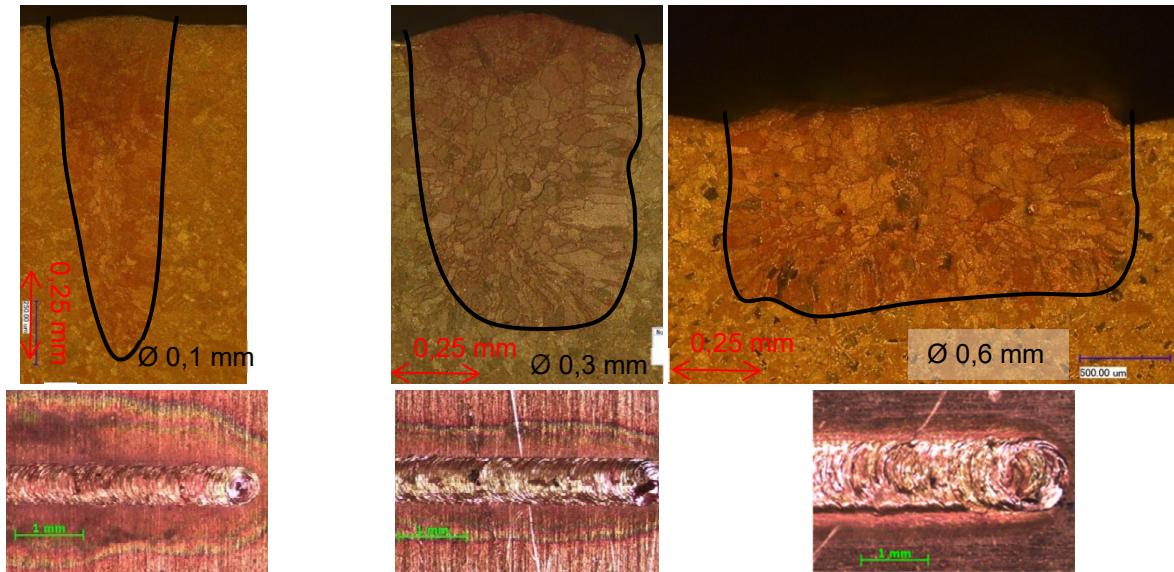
Weld seams with variable wobbling diameter, Power: 1kW, 1m/min, 300Hz.
